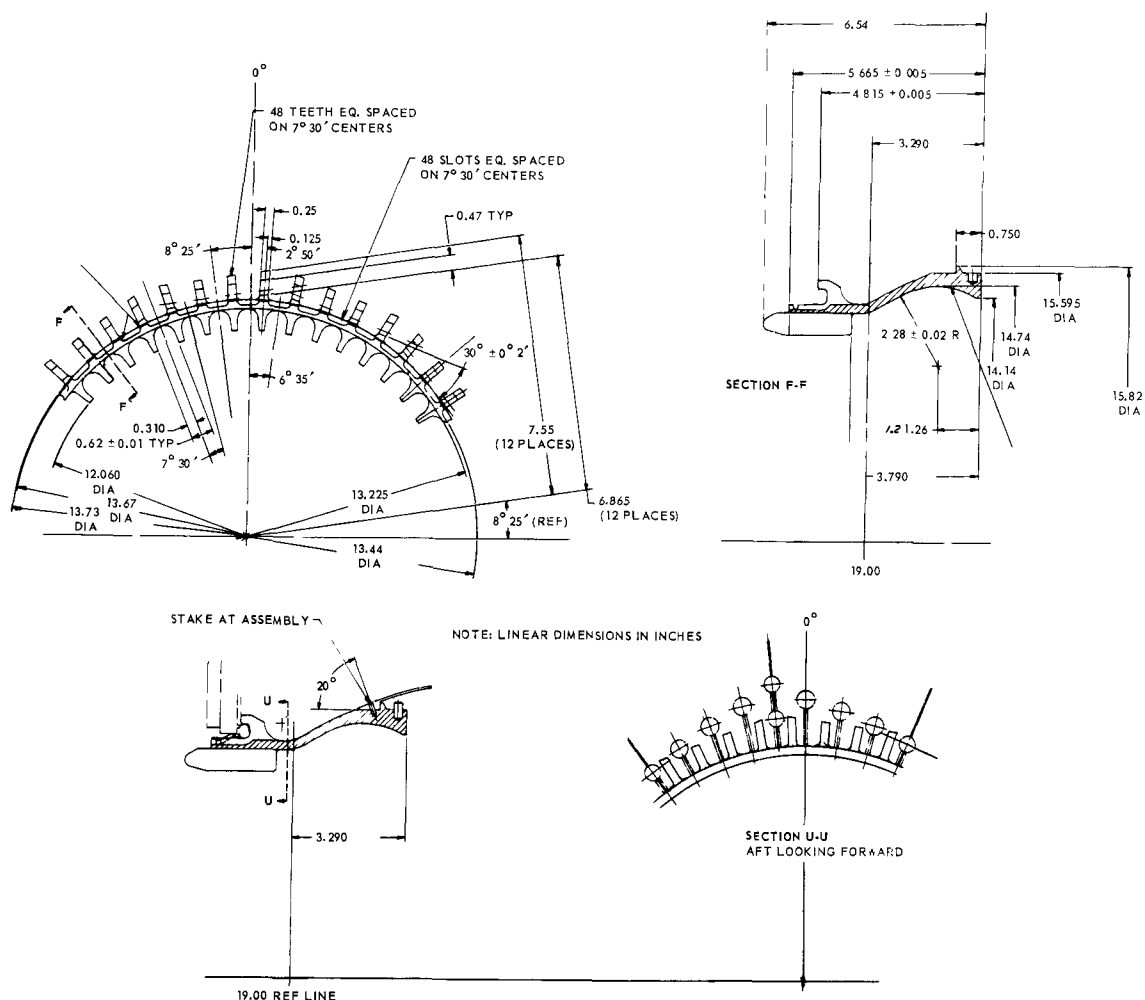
Aft-retainer assembly, center hub (Dwg. 207R910)
